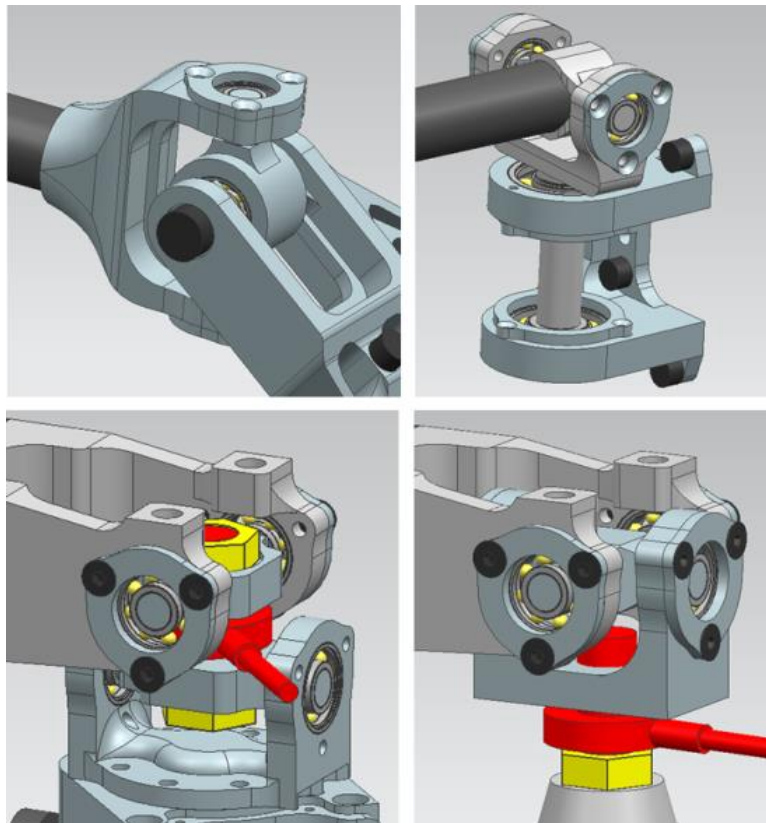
Universal joint designs. From upper left to lower right: lower ankle, lower hip, knee, universal upper.
